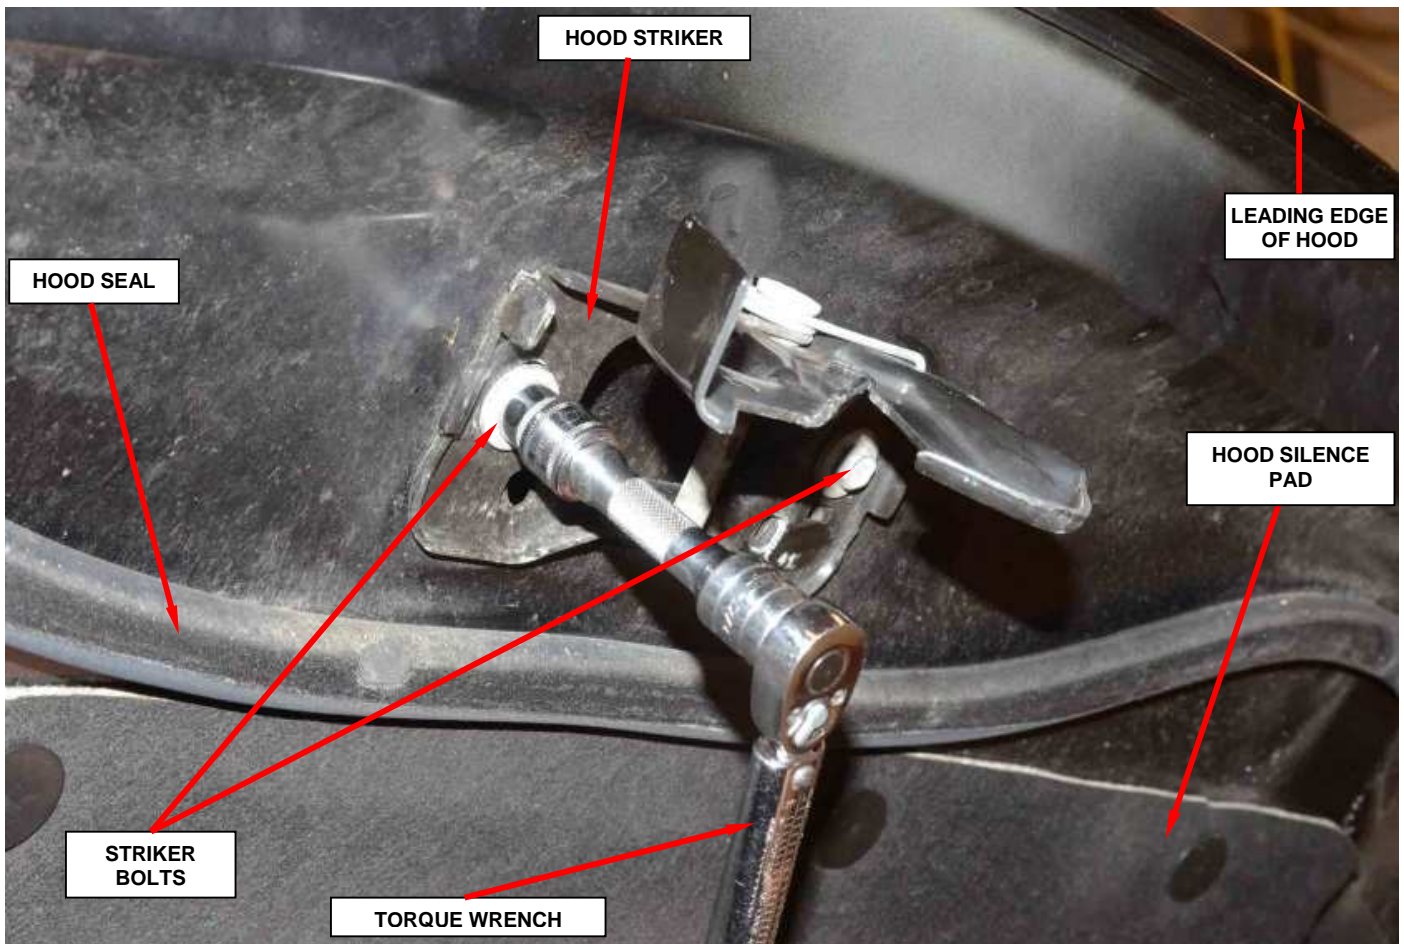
Tighten Both Hood Striker Bolts to Proper Specification
